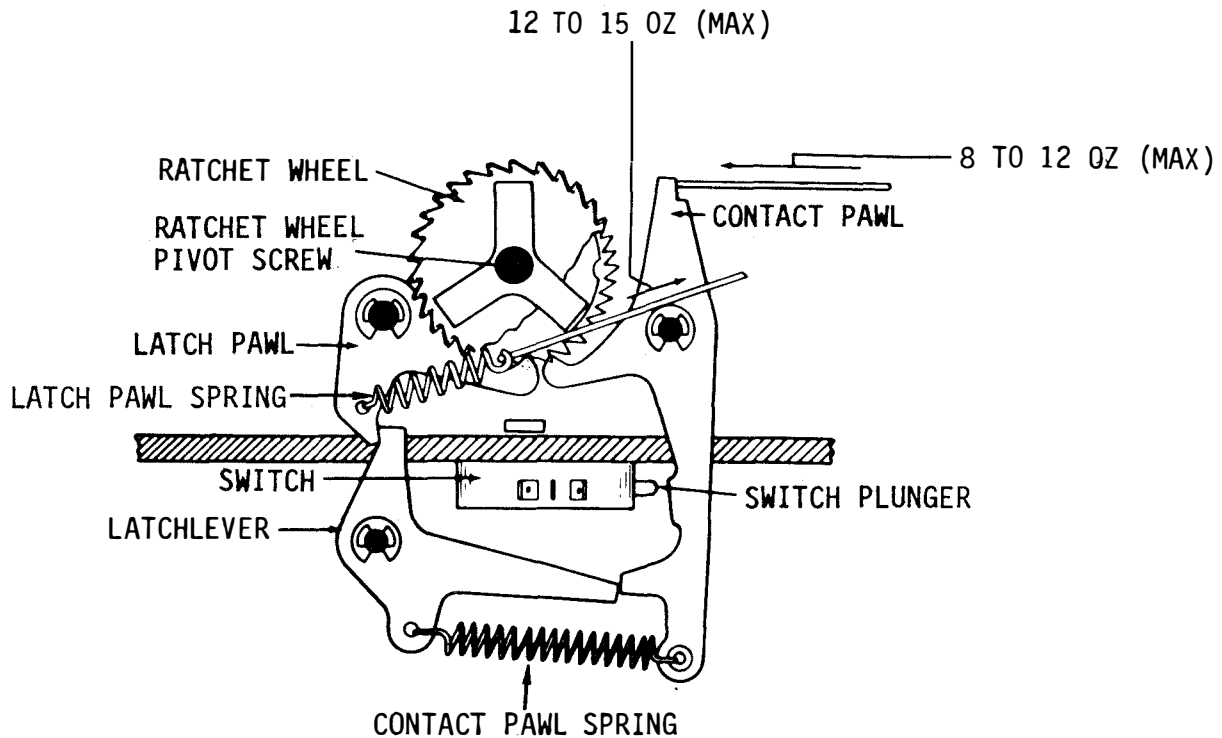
Contact Latch Pawl Spring and Contact Pawl Spring
